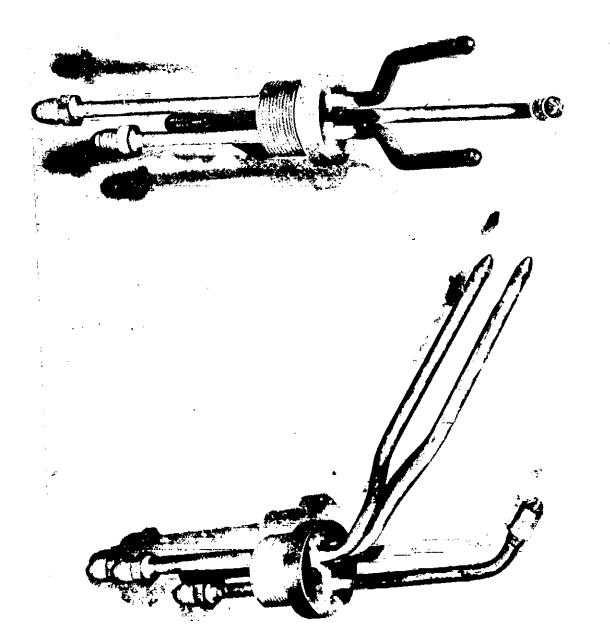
Fuel Injector Assemblies, Radial/Axial Staged Combustor.
